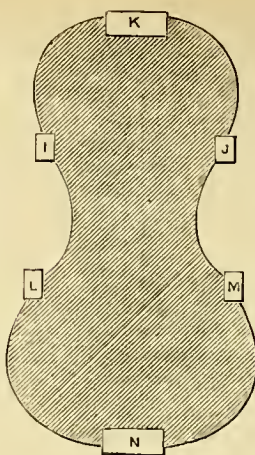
SOLID MOULD WITH BLOCK PIECES FITTED.
